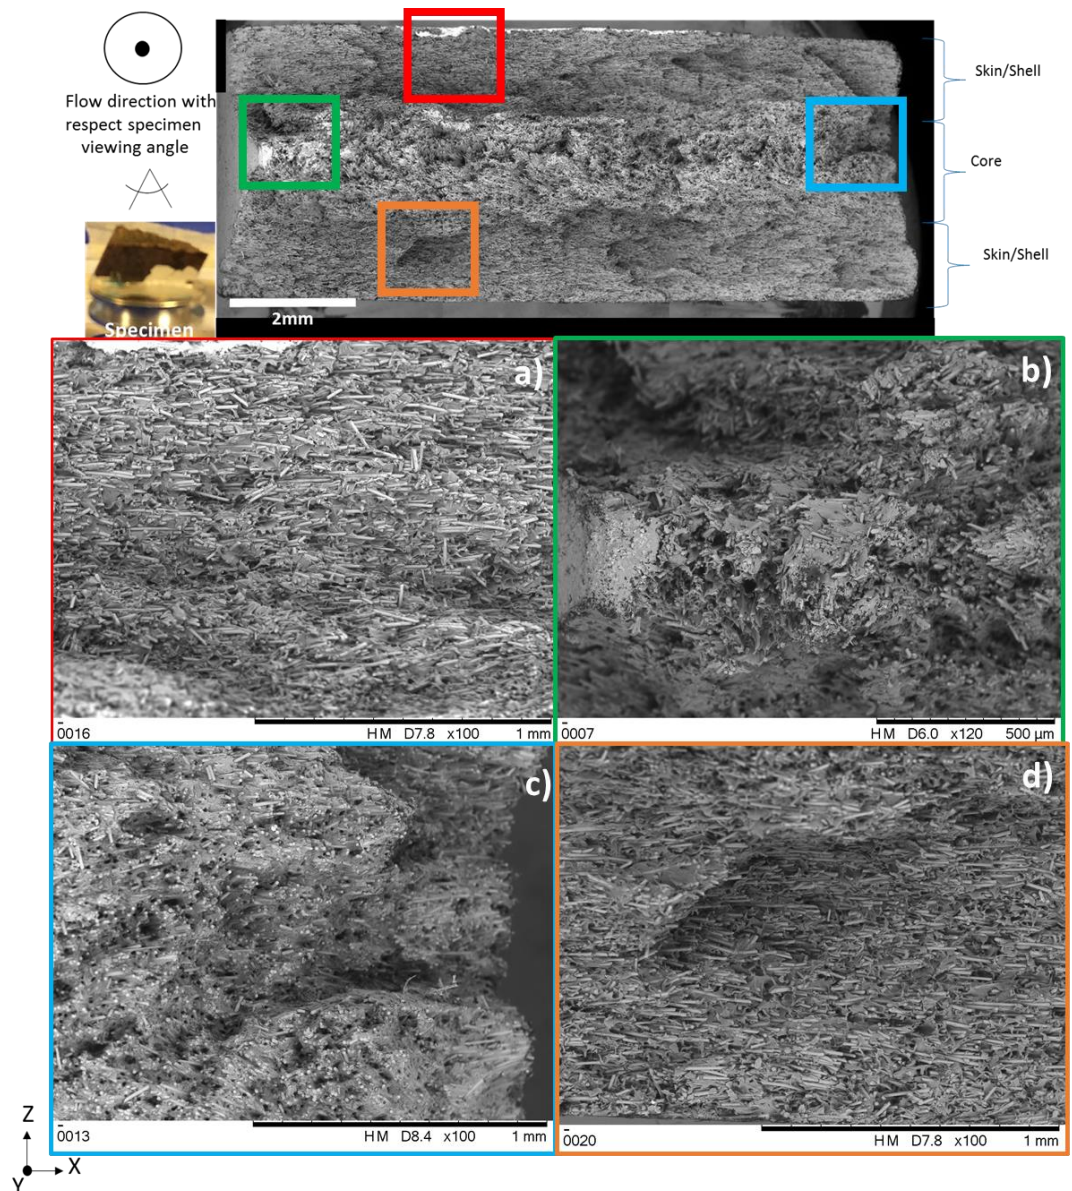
Fracture surface of 45° reference specimen tested in fatigue R=-1 and close-up images. $V_f=30\%$.
